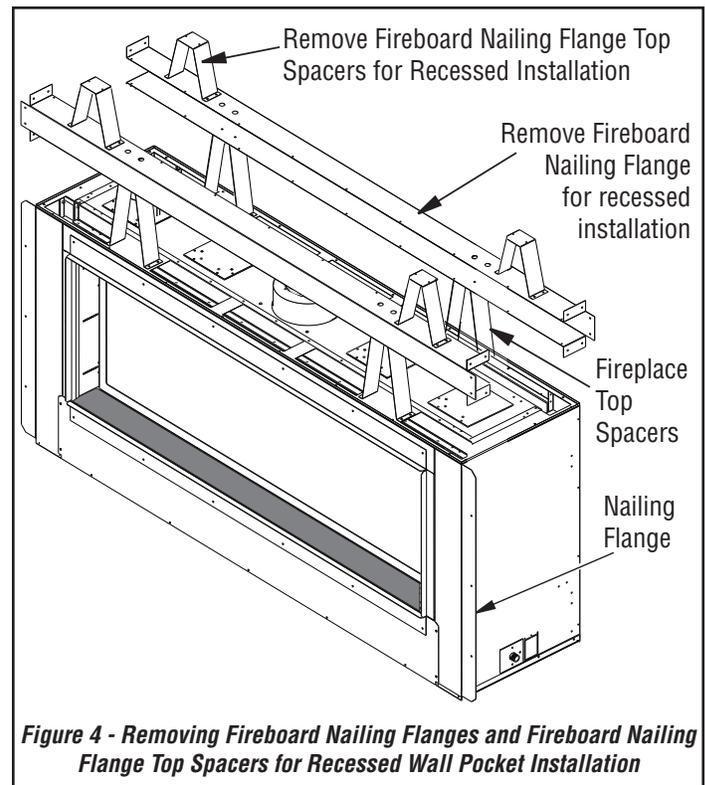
Removing Fireboard Nailing Flanges and Fireboard Nailing Flange Top Spacers for Recessed Wall Pocket Installation
